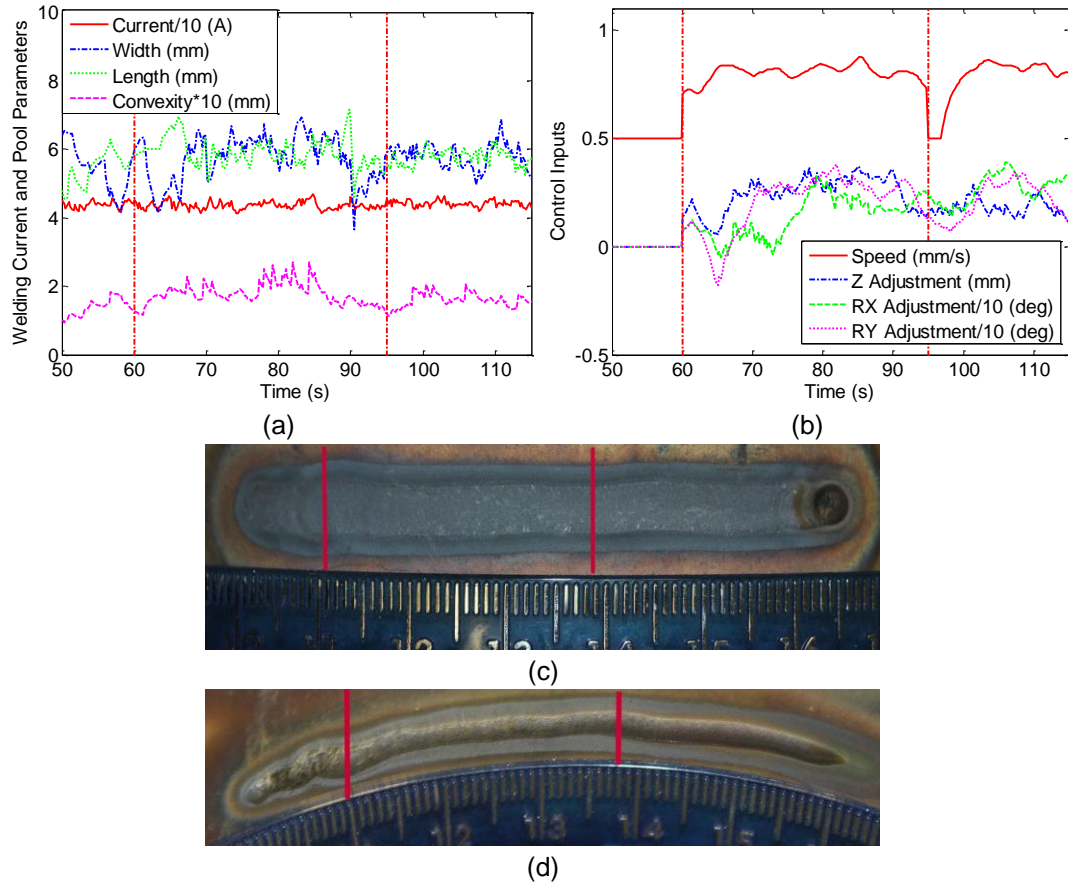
Experiment 2 results (a) Welding current and weld pool parameters (b) Control inputs (c) Front-side bead (d) Back-side bead.
